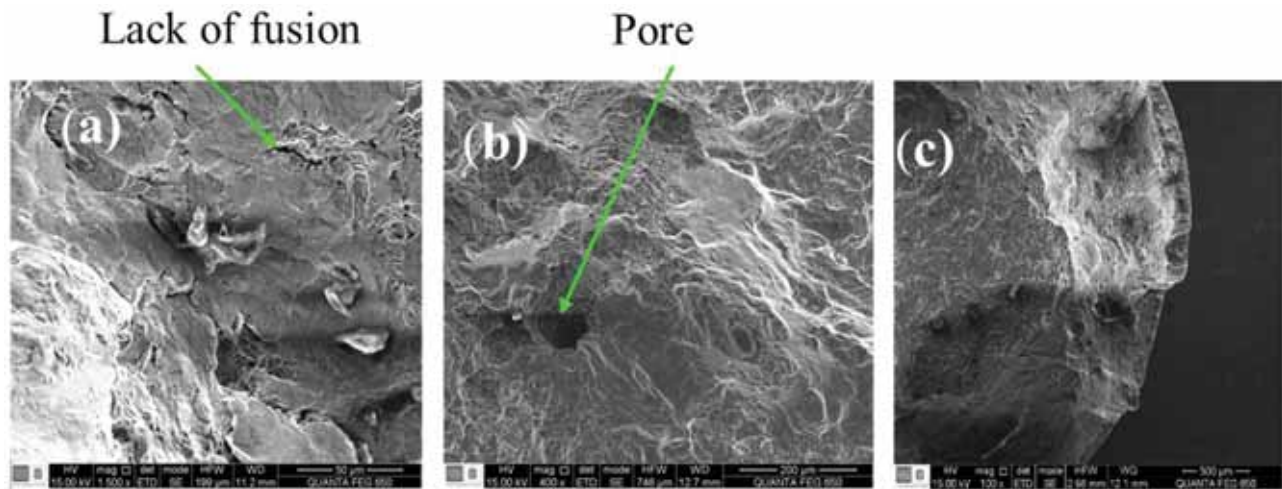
SEM micrographs showing fracture morphology: (a) lack of fusion; (b) pore on the matrix; (c) general view of fractured surface.
